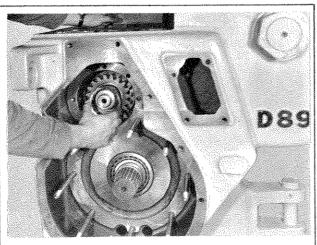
Removal and Disassembly of Bevel Gear Shaft Assembly (Sheet 1 of 3) -
